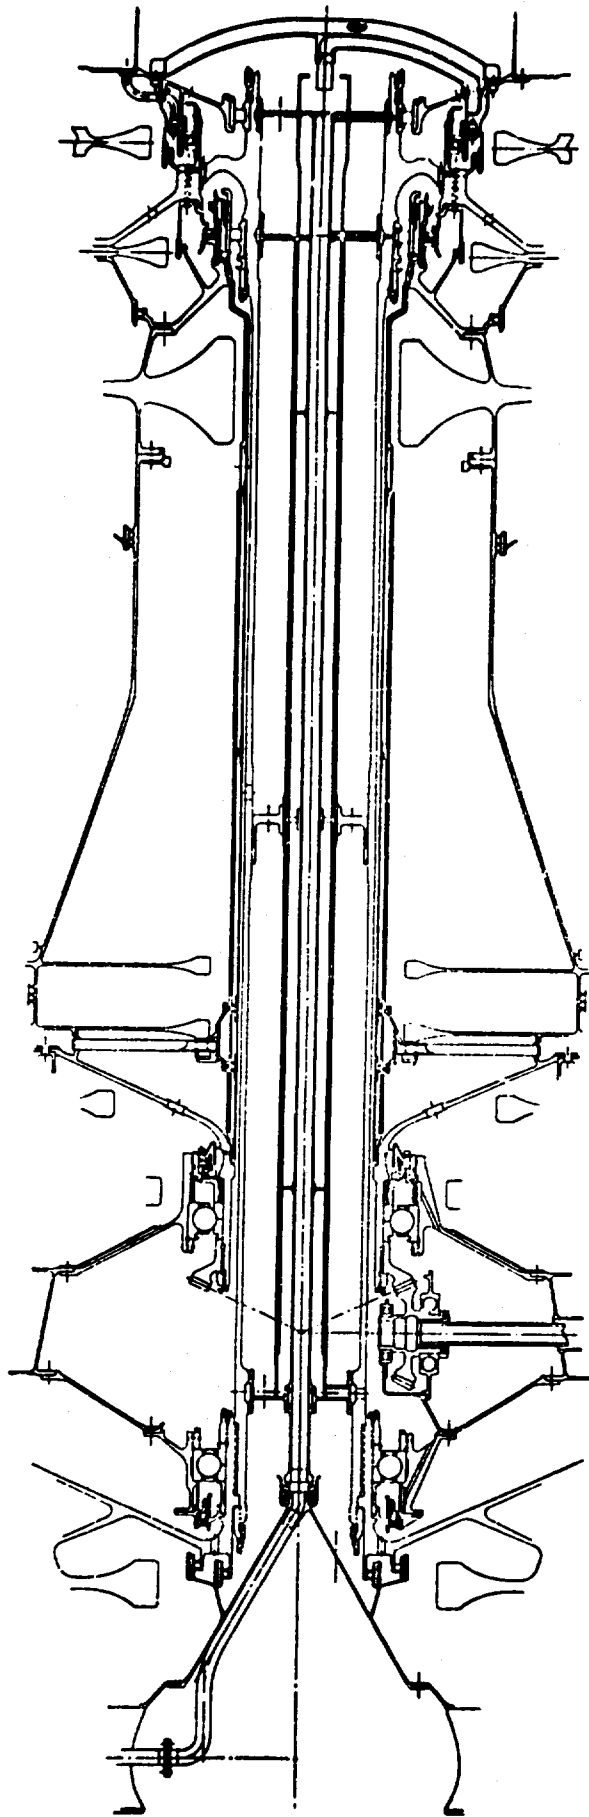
GE16/PLITE-1A Sump Area Layout Drawing.
